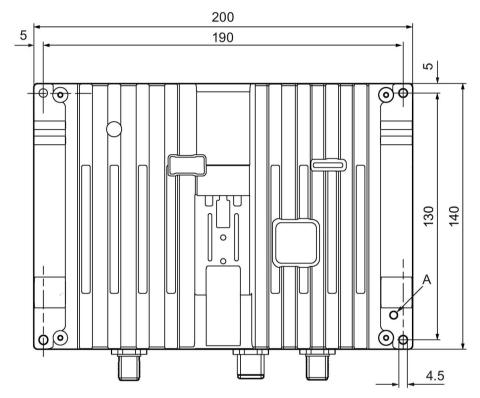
Drilling pattern for the RF290R (dimensions in mm)
